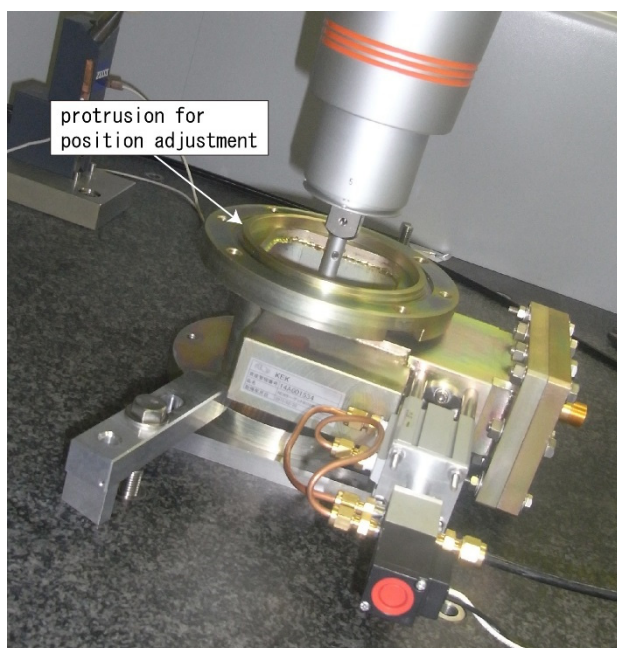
Rotational motion type PD unit on the 3D coordinate measuring machine.
